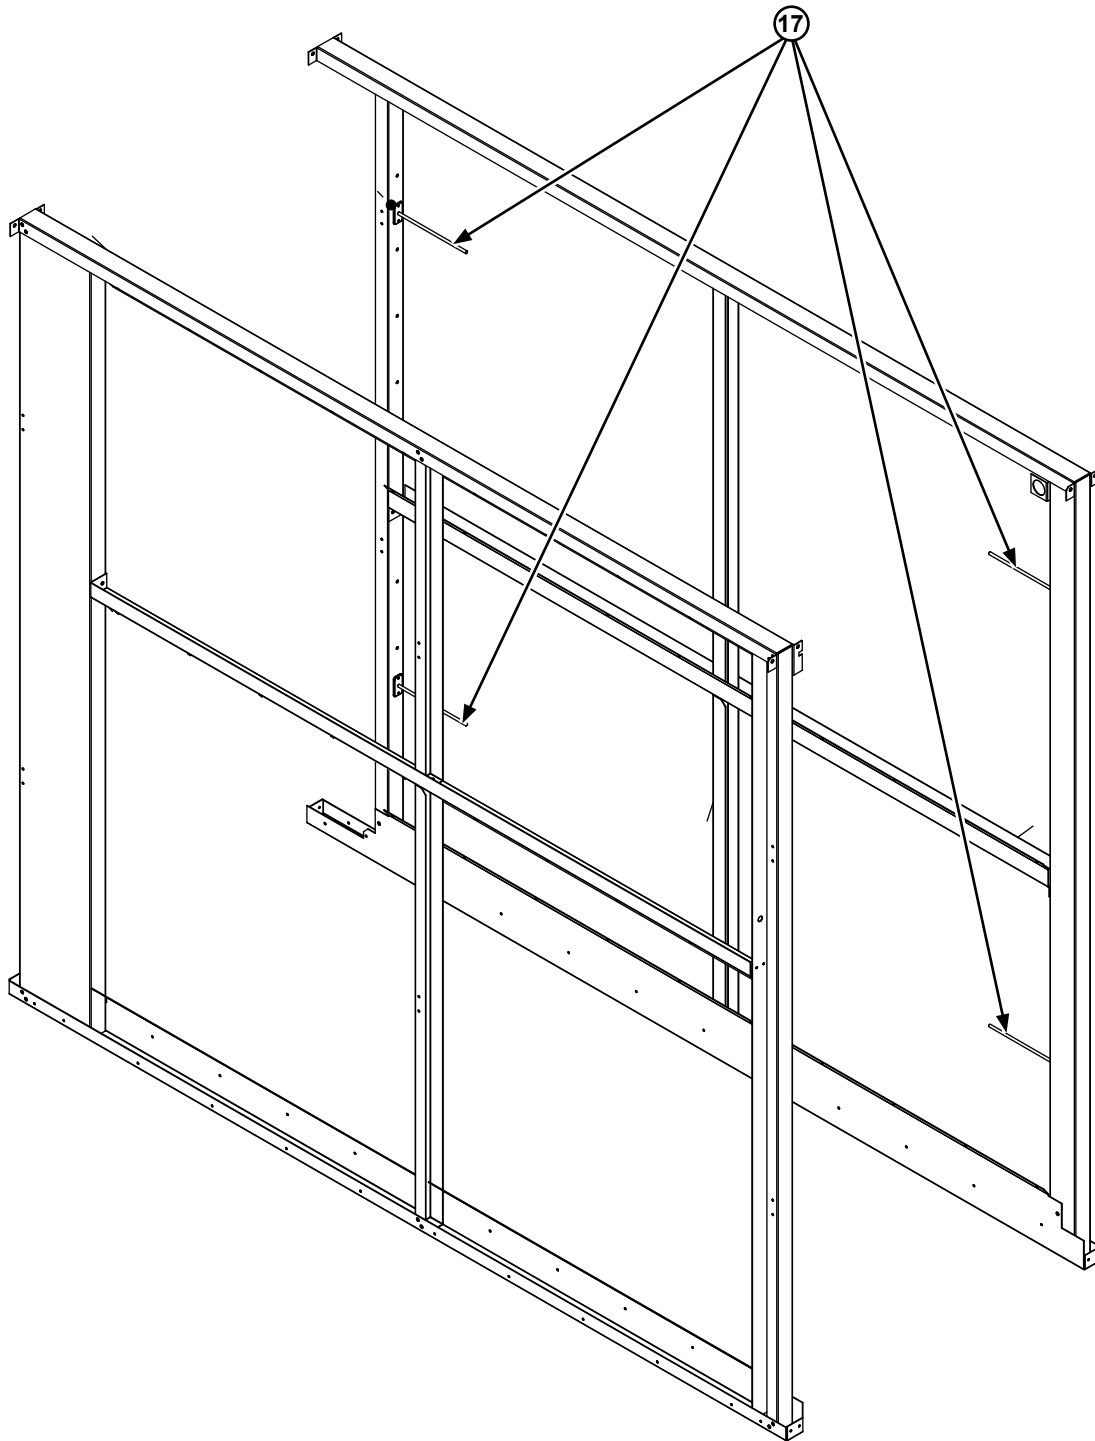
FLEXSYS EVAPORATOR SENSORS
